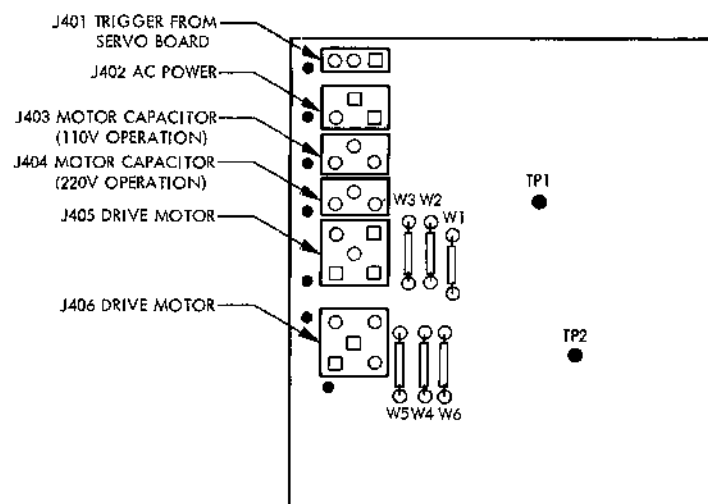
Motor Control PCBA, Test Point and Connector Placement
